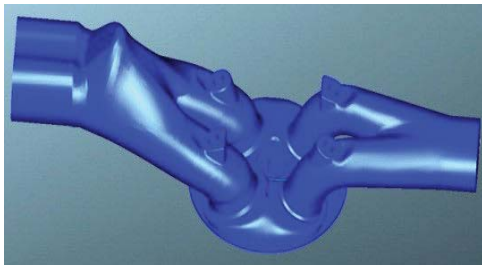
Perspective view of the combustion chamber geometry layout with 4-valves (top view)
